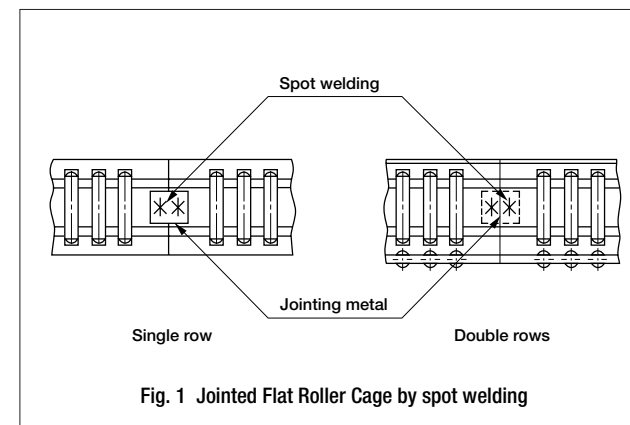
Jointed Flat Roller Cage by spot welding
